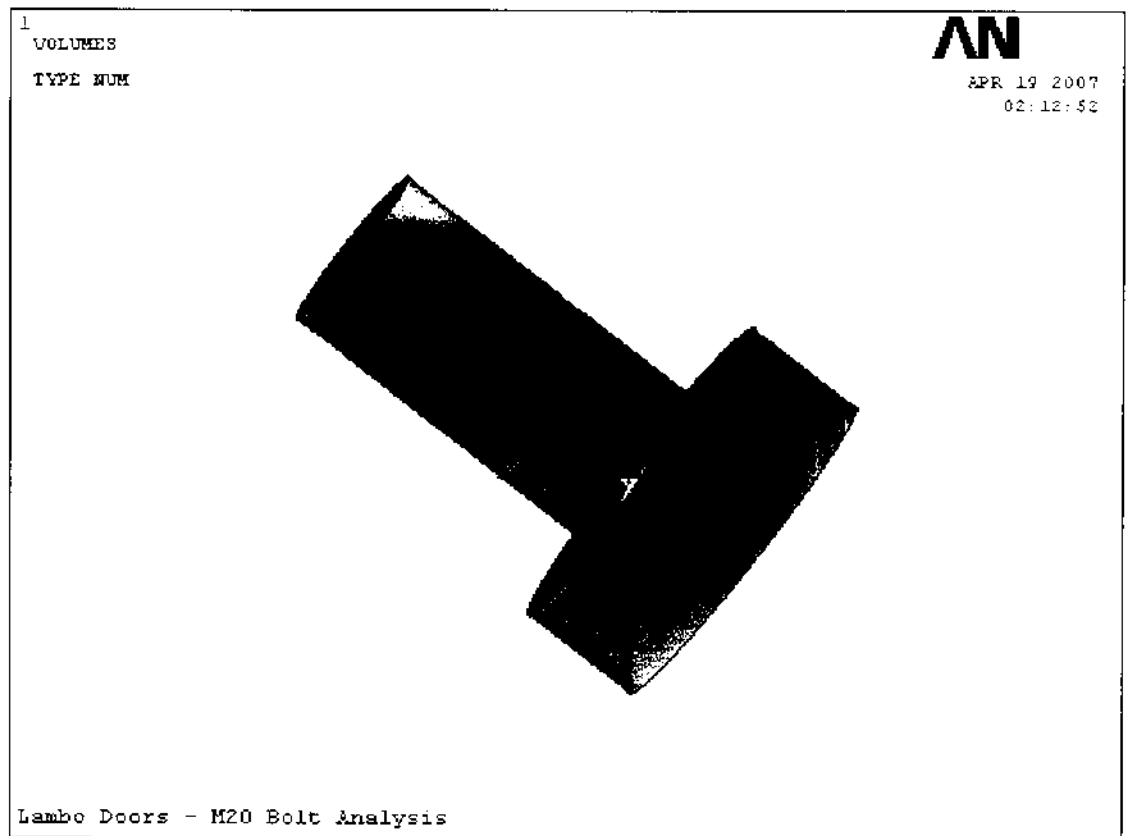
GEOMETRIC REPRESENTATION OF FLANGE BOLT
